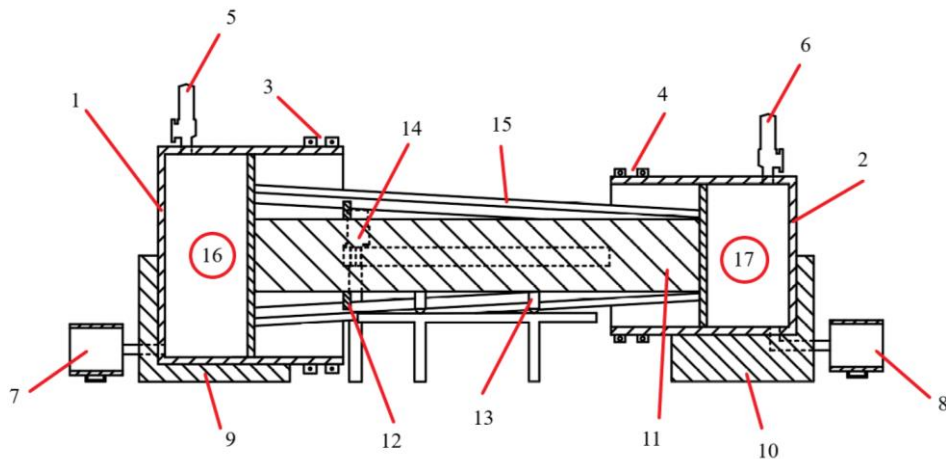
Schematic drawing of the heat pump with the primary components identified.
